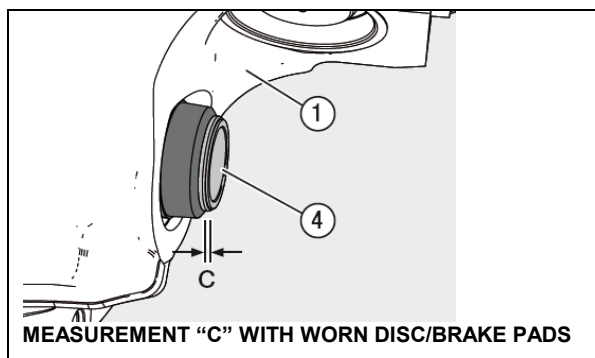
BRAKE PAD WEAR CHECK ON DRIVE AXLE
